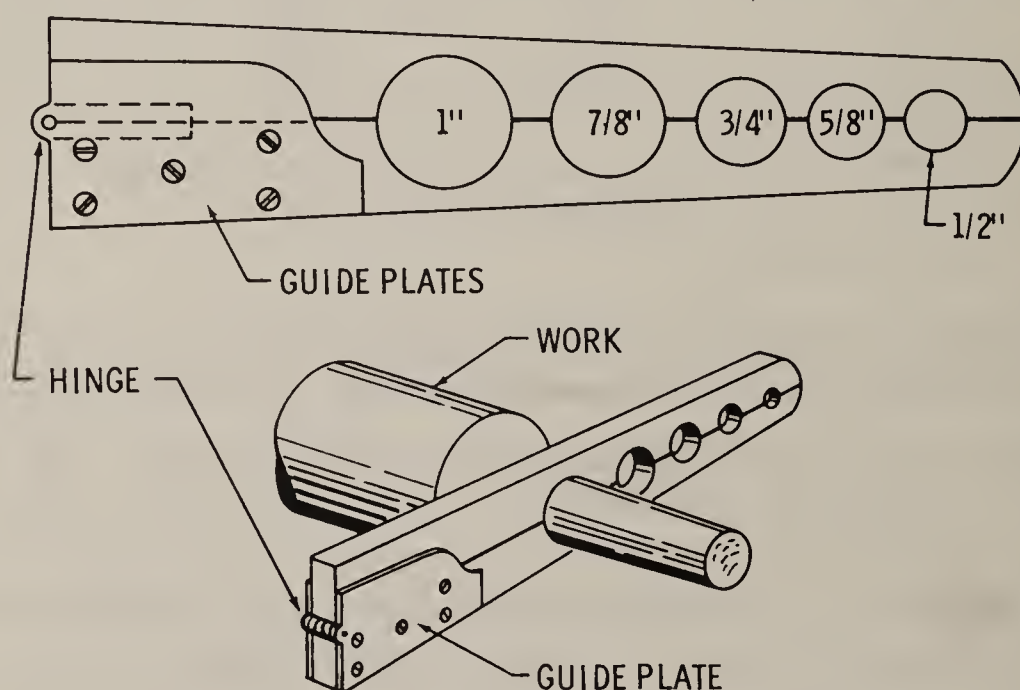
Typical hinged-end, outside-diameter gauge and measuring methods.
